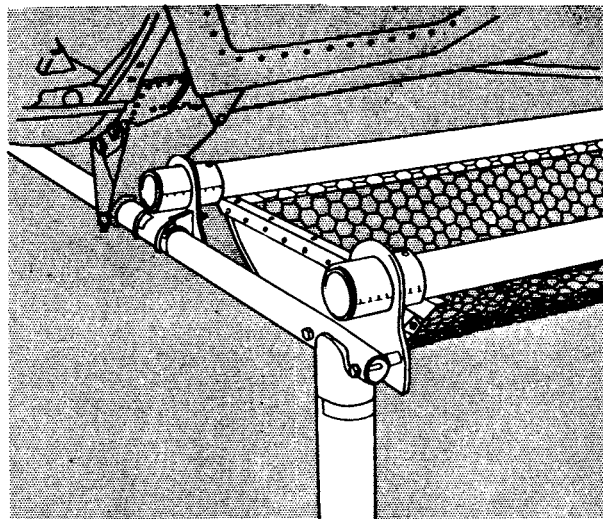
Typical cargo rack installation No. 1 (showing attachment detail).
